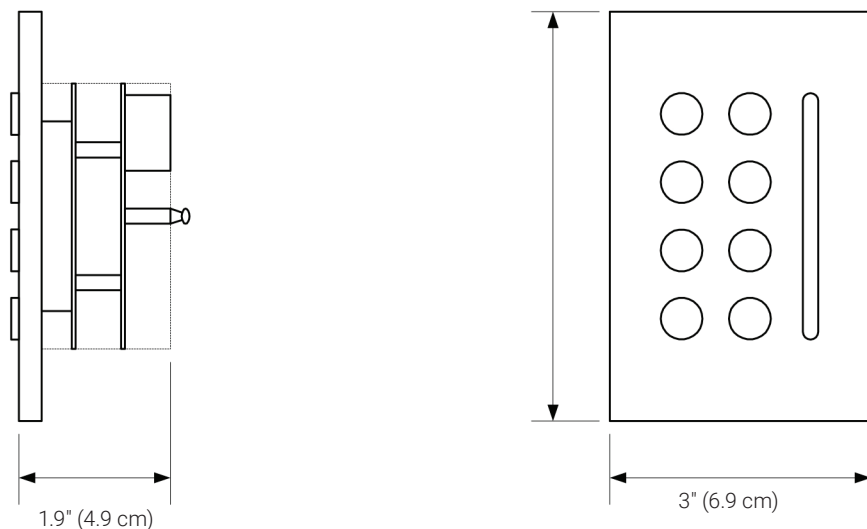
SIDE AND FRONT OF THE KEYPAD
